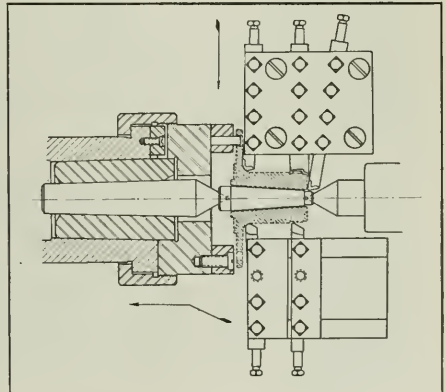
Finishing Operation on the Rear Hub which is also performed in a Fay Automatic Lathe
